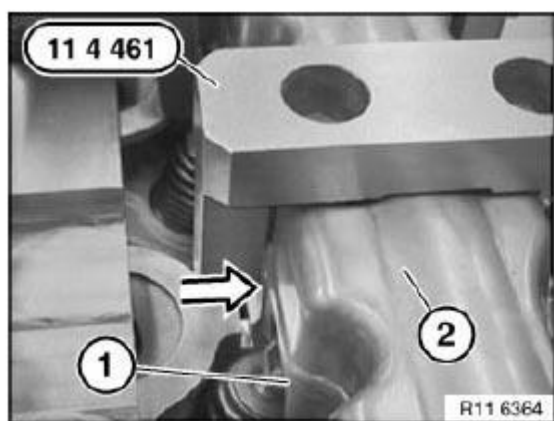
Identifying Upper And Lower Bearing Bank With Special Tool (11 4 461)
